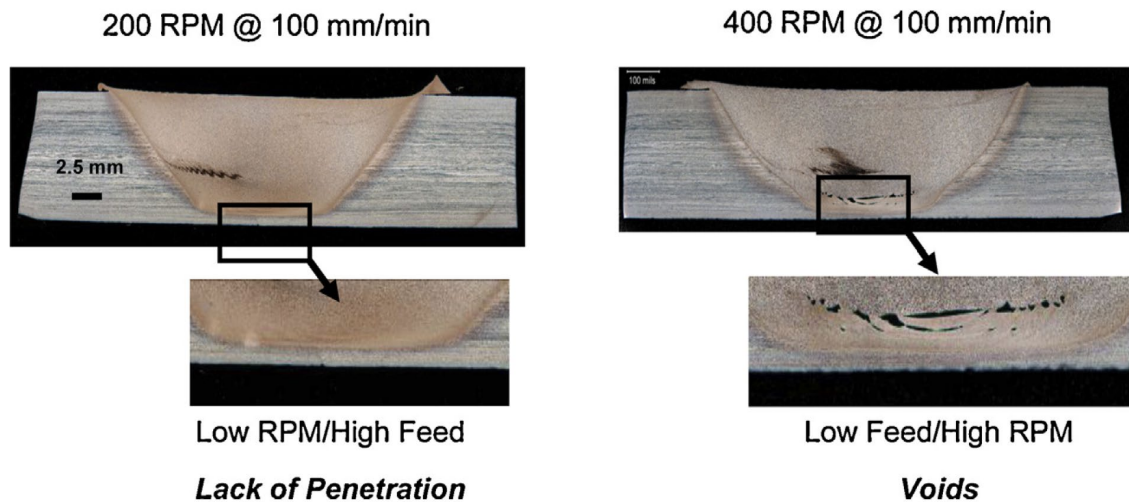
Butt FSW of 6 mm thick Ti6Al4V. Cross-sections of welds show typical defects [172].
